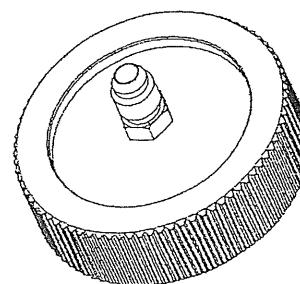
Model PDA-D2 Pneumatic Actuating Adaptor.
